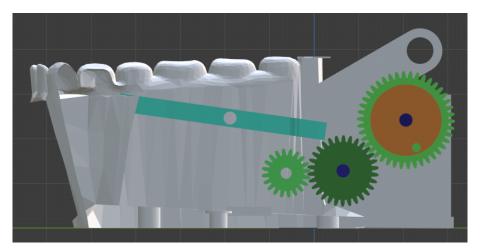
Gearbox Final Design Inside of the Lower Jaw
